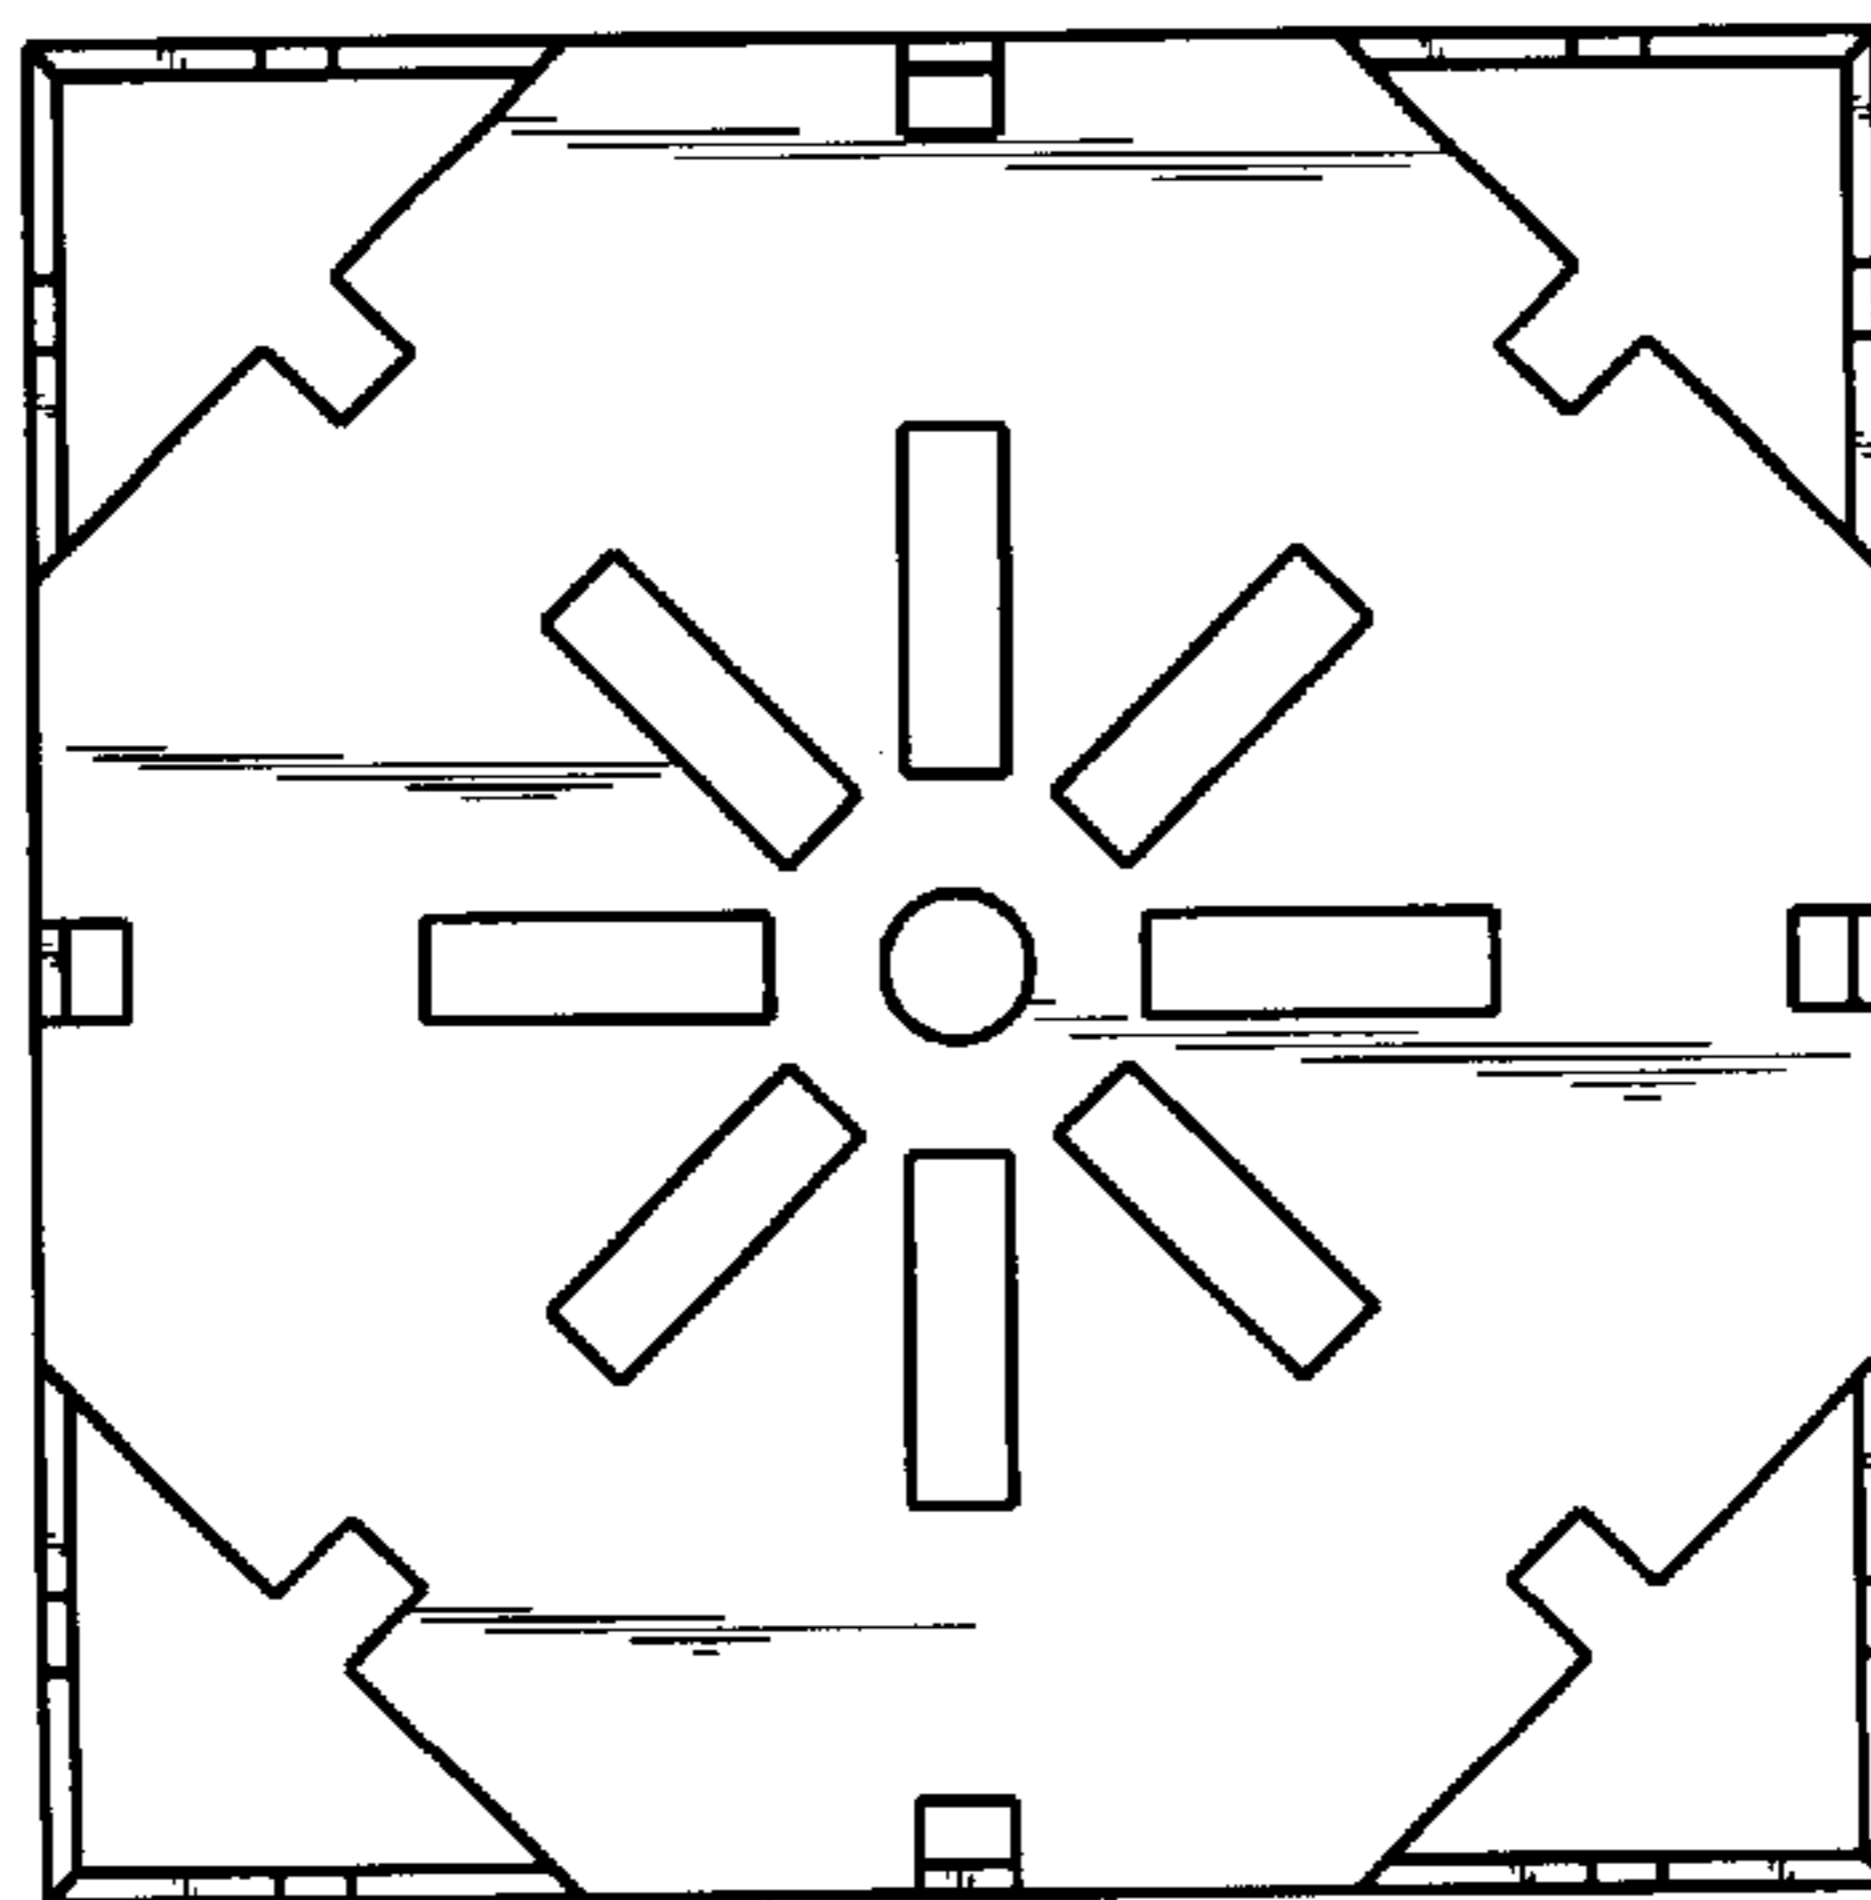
is a perspective view of a central component for a structural assembly, all sides being identical; and, FIG. 2 is a view of one side thereof.
